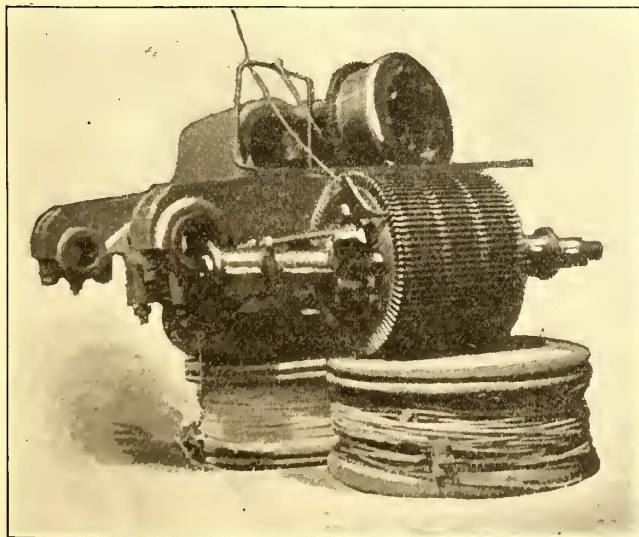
GENERAL VIEW OF MOTOR AND PARTS.
